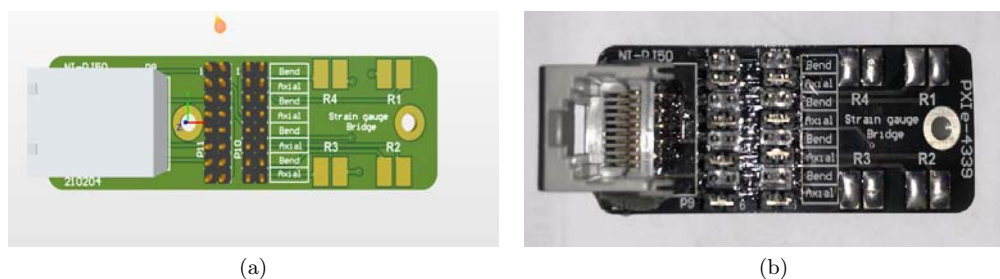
Design of the strain sensor configuration selector (a) 3D view of the design (b) prototype image.
